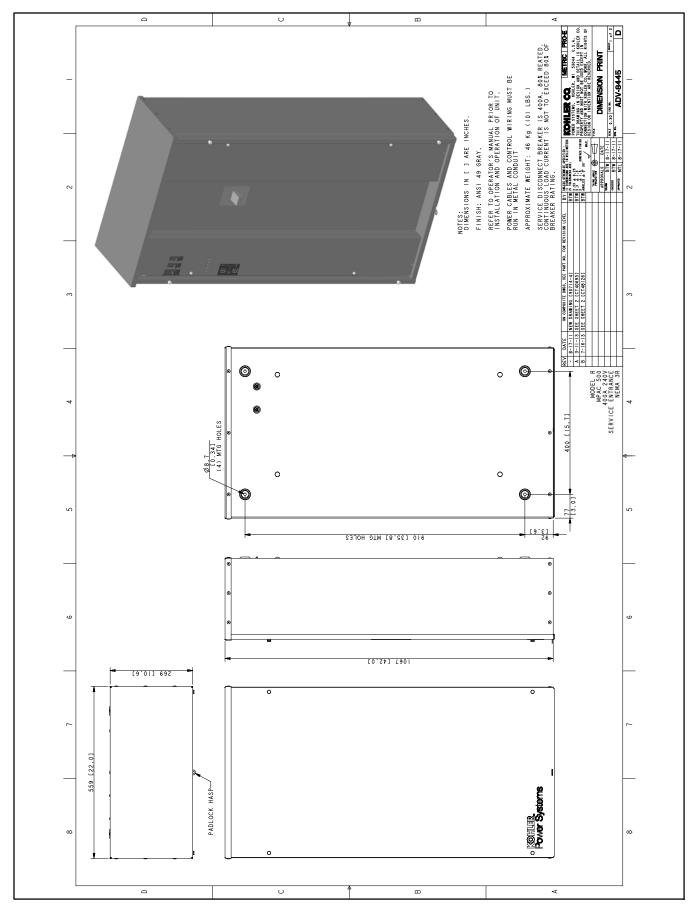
Dimension Drawing, 400 Amp Service Entrance Model, ADV-8445, Sheet 1 of 2
